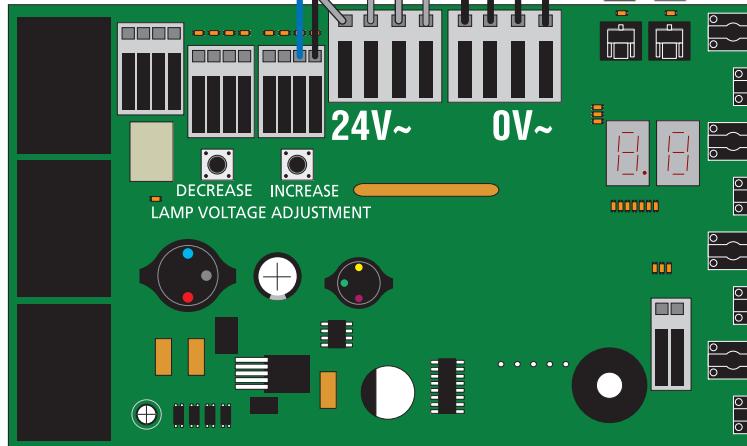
Install the IOLS Adapter Handpiece LED Circuit Board
